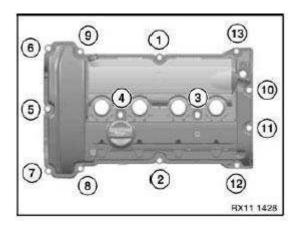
Cylinder Head Cover Bolt Connection And Installation/Removal Sequence Courtesy of BMW OF NORTH AMERICA, INC.
